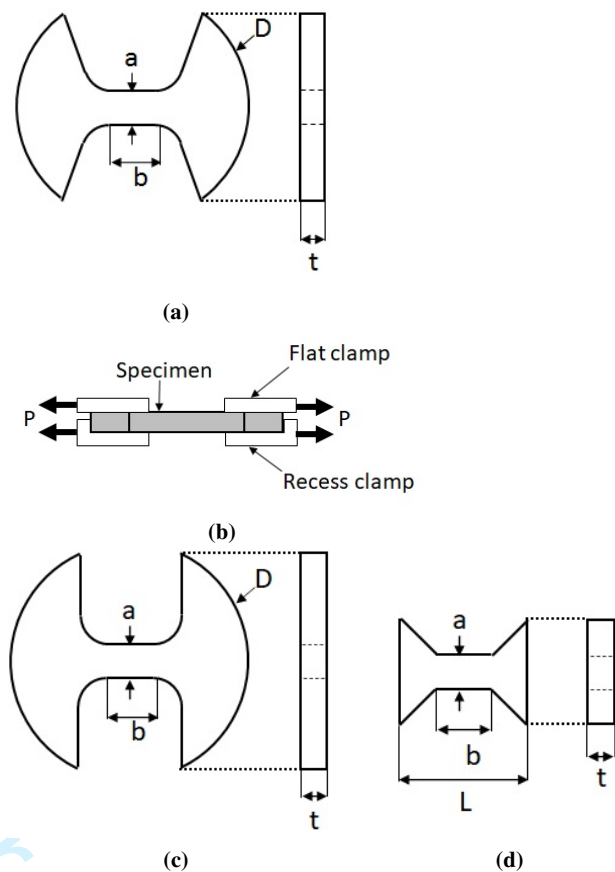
(a) Disc tensile specimen. D is 9.44 mm, a is 2 mm, b is 2.06 mm and t is 0.5 mm. (b) Testing diagram of a disc tensile specimen. (c) Ultra small size specimen, also known as micro tensile specimen. D is 8 mm or 10 mm, a is 1.5 mm, b is 2.6 mm or 3 mm and t is 0.5 mm. (d) Modified ultra-miniature specimen. L is 5.5 mm, a is 0.4 mm, b is 2.3 mm and t is 0.25 mm.
